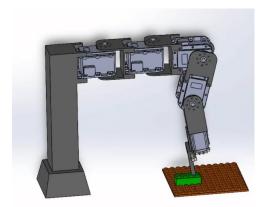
4-DOF robotic manipulator for Lego assembly building
